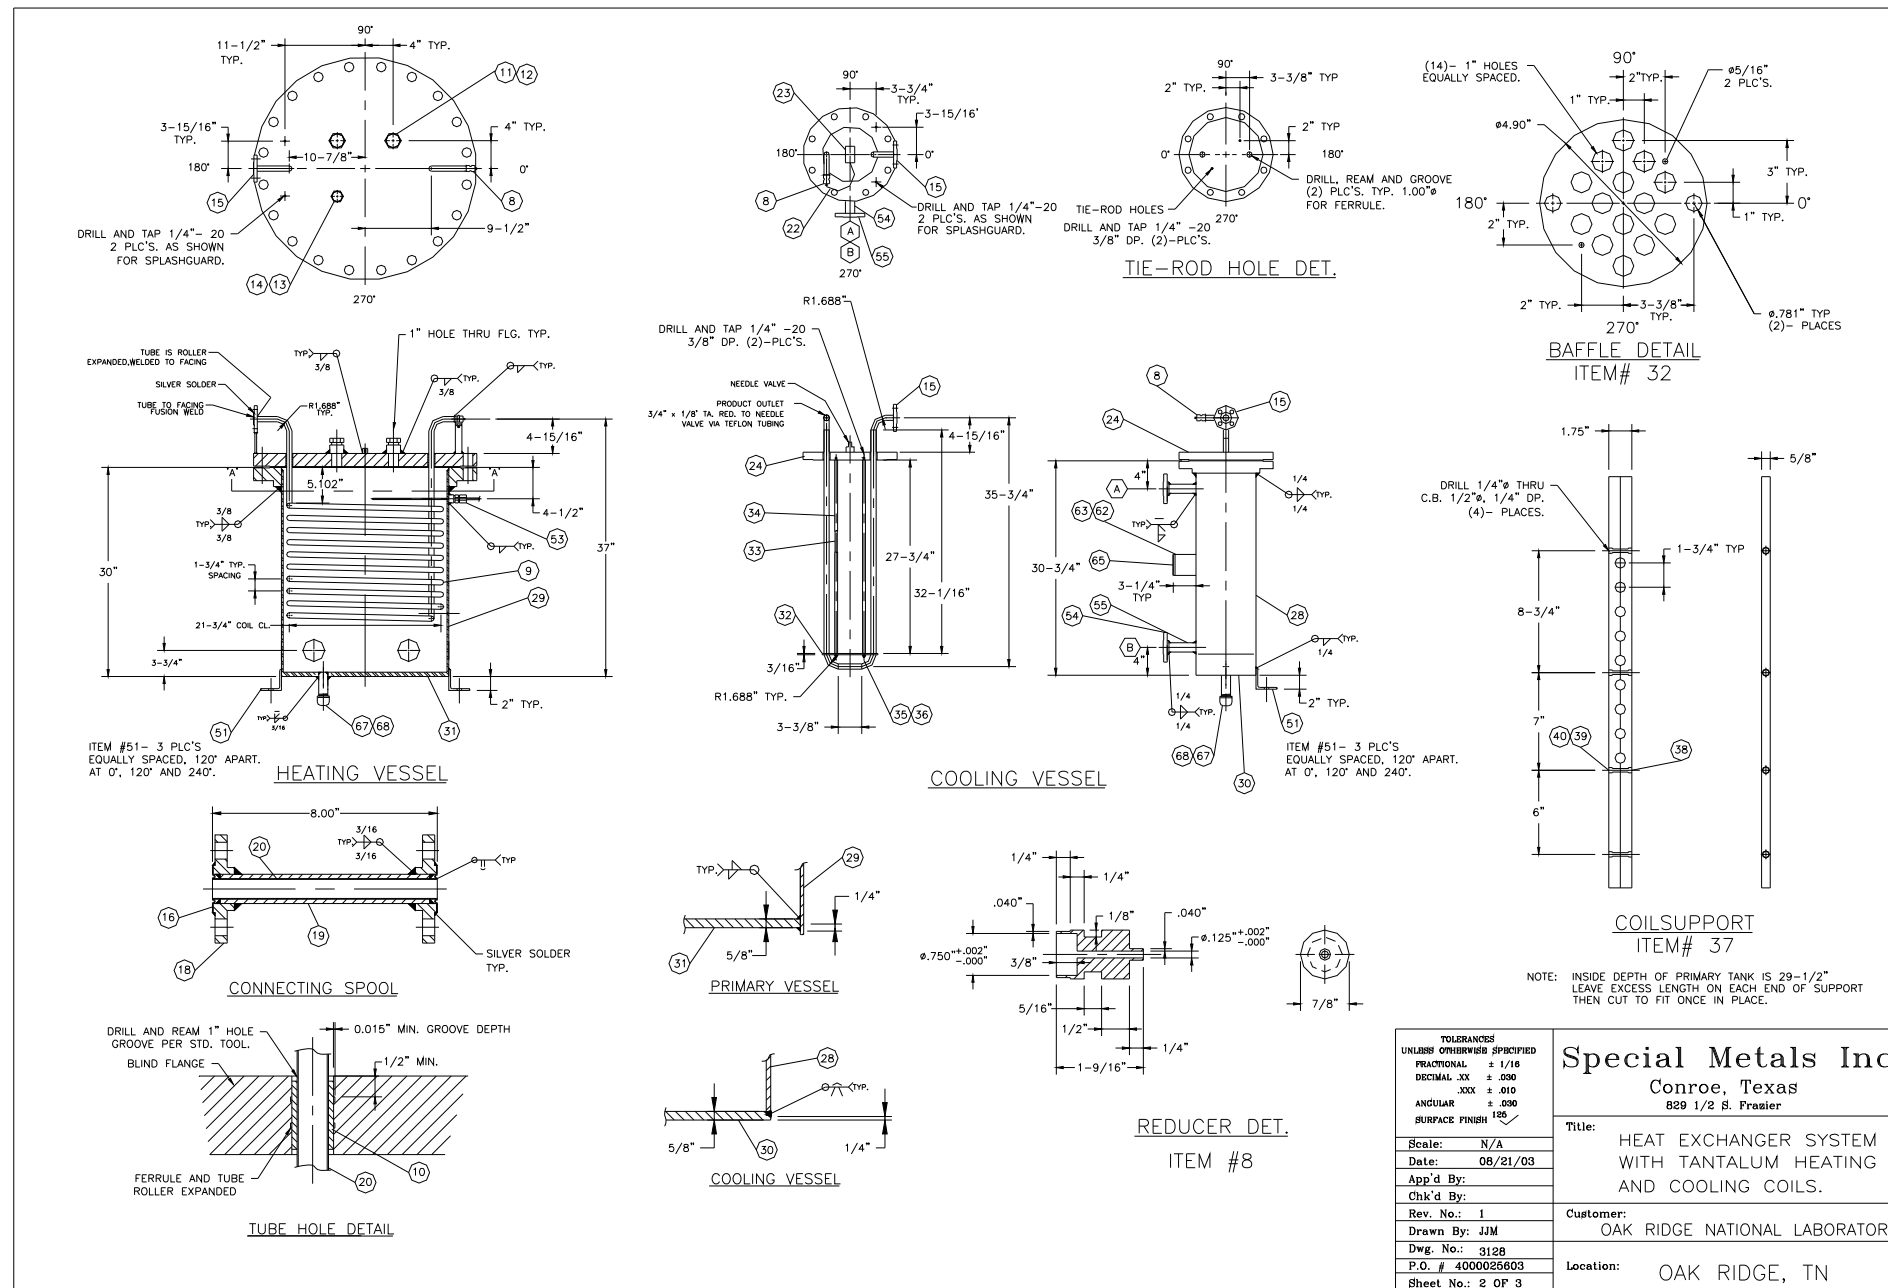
Destruction Unit with Tantalum Heating and Cooling Coils Component Views
